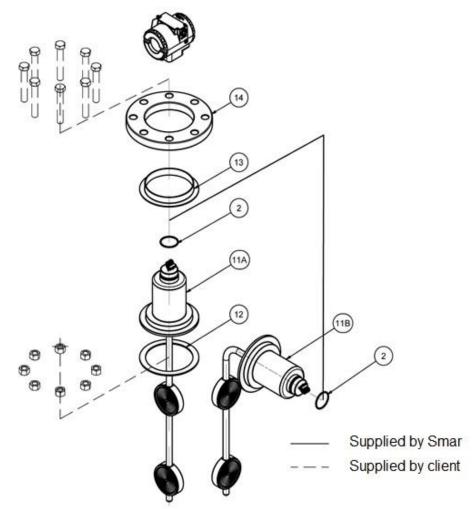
DT301 -	Exploded	View (Industria	Model)
